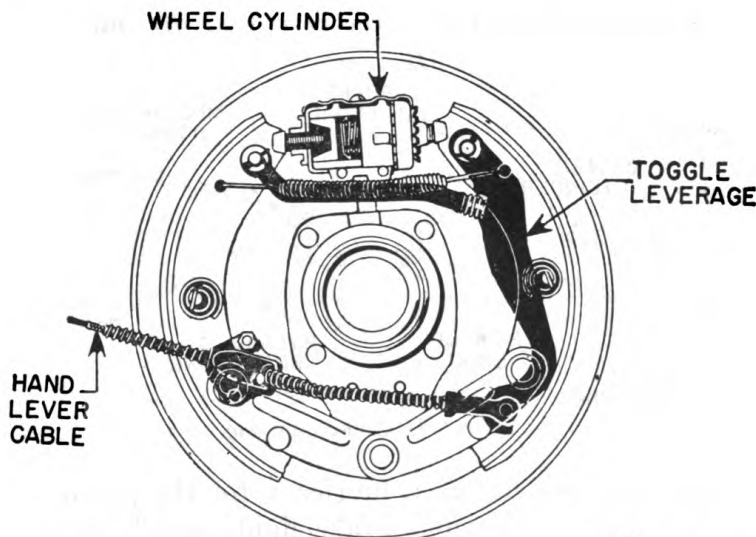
Handbrake linkage on brake hydraulically operated.
